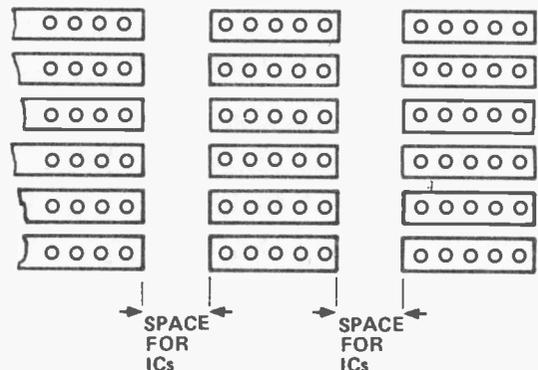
The track pattern of DIL-board. Using this type of board saves on cutting.
